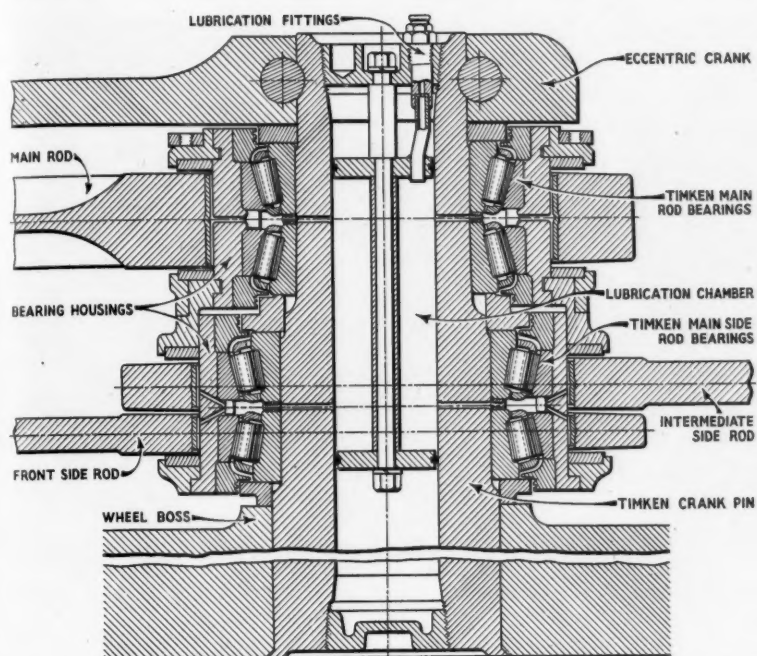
Arrangement of roller bearings for rods at main crankpin, British Timken
